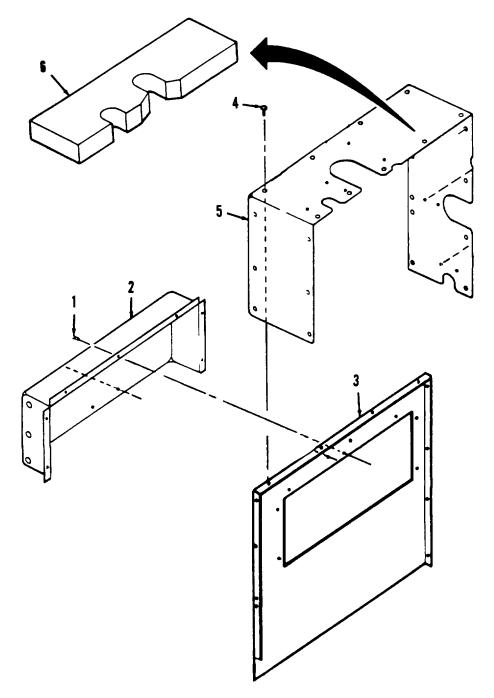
Enclosure Assembly, Outlet Side Disassembly.
